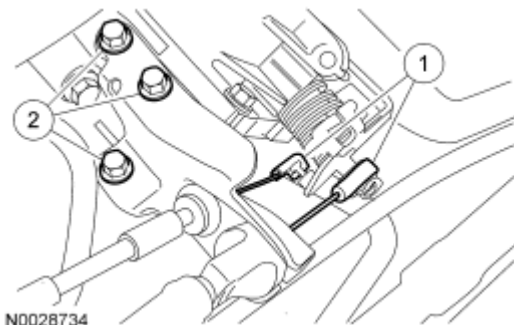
Accelerator Cable, Speed Control Cable & Bracket Bolts
